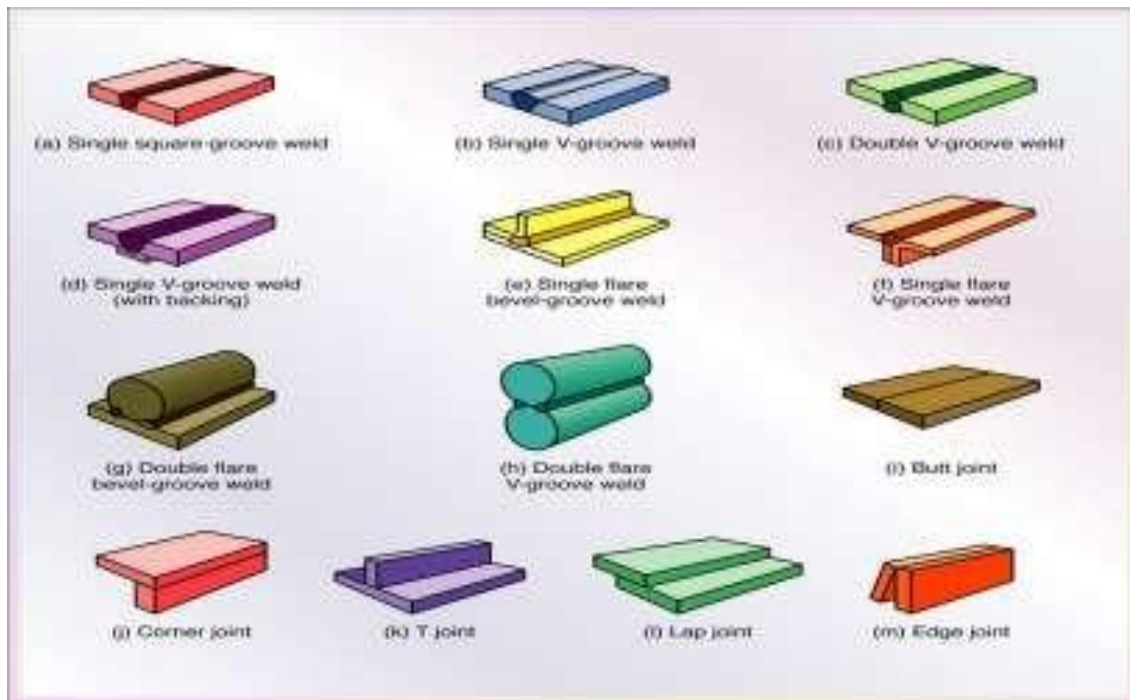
The Several Basic Types Of Weld Joints Are The Butt, Corner, Tee, Lap, And Edge
